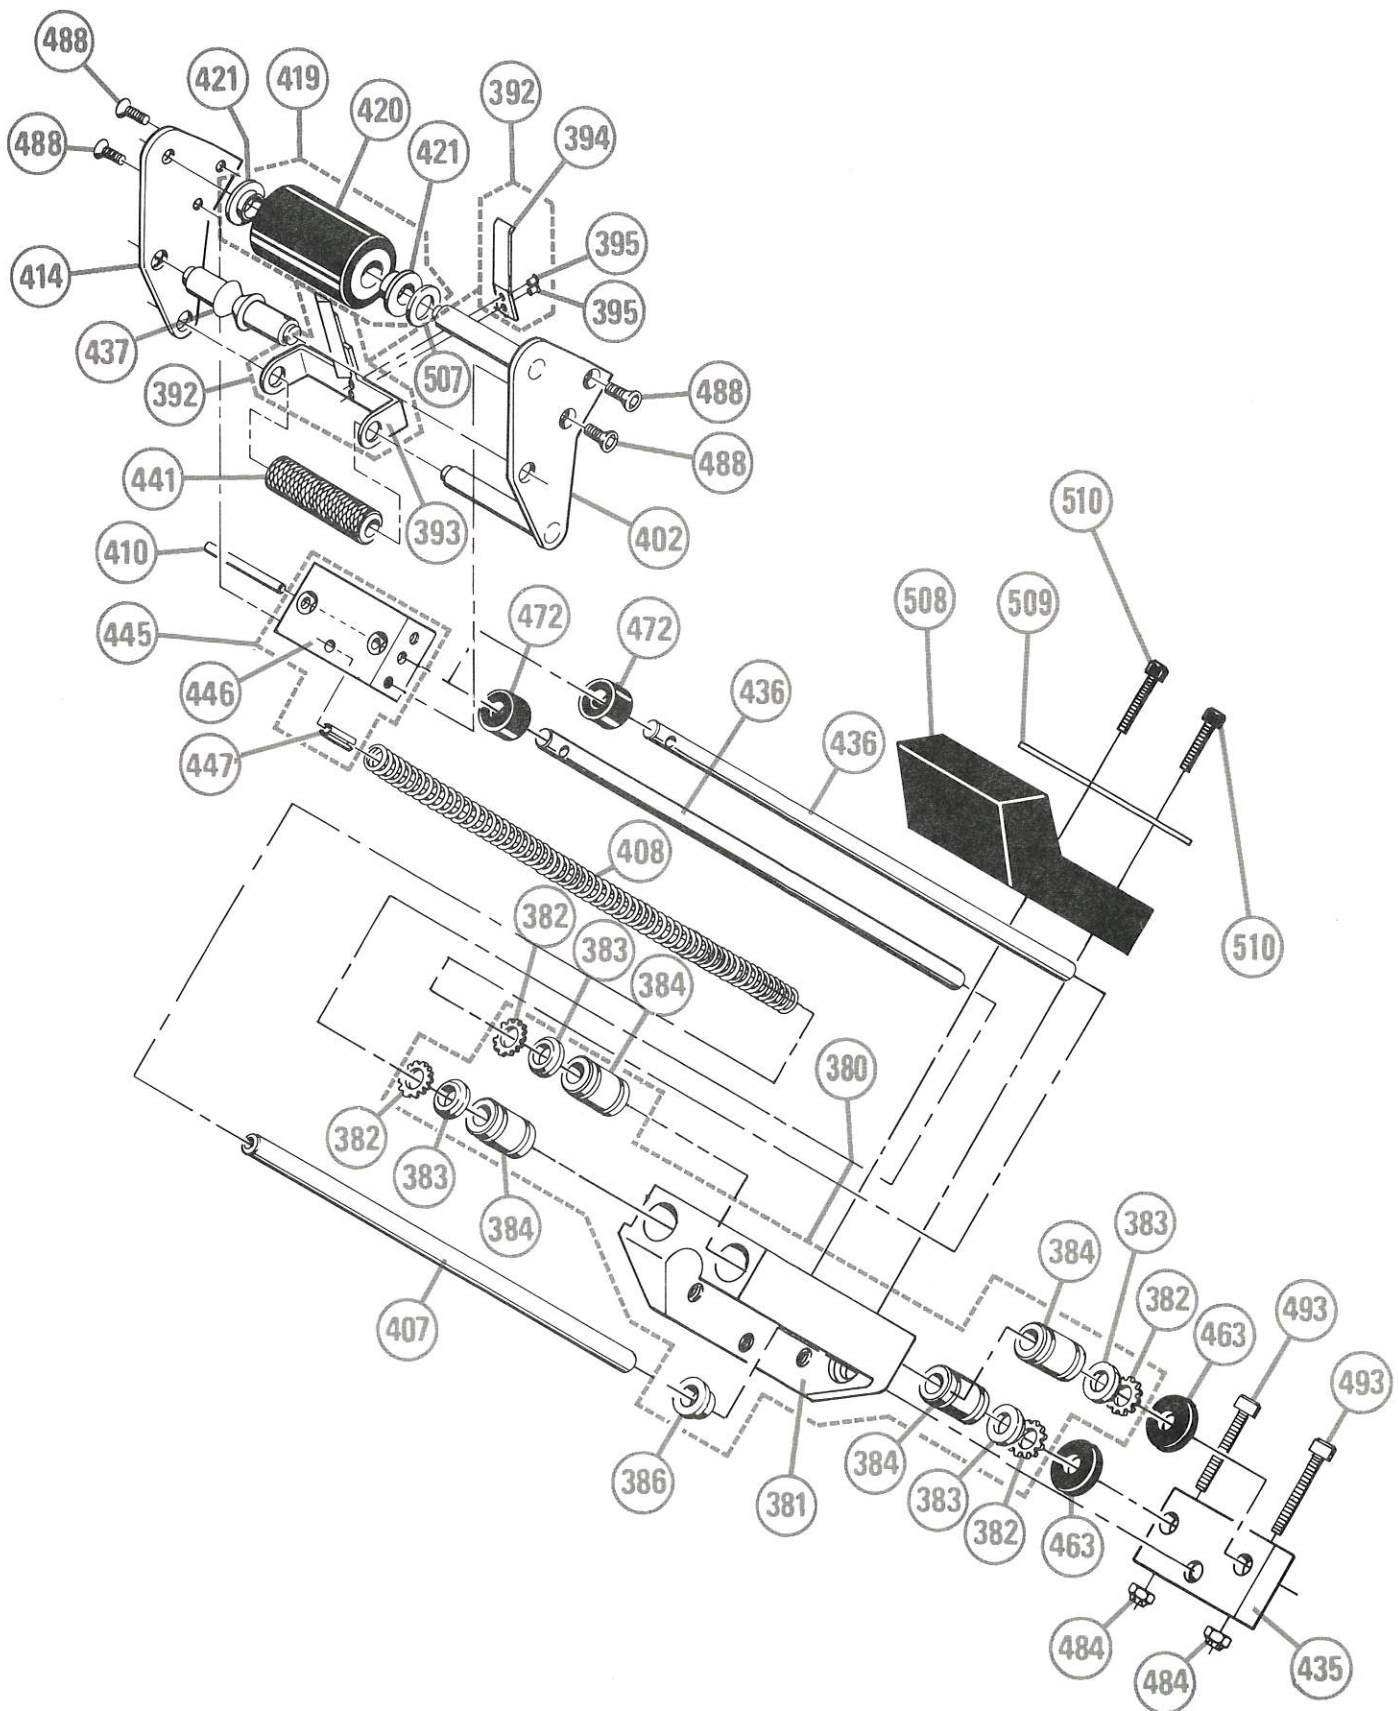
APPLYING ARM ASSEMBLY - LOWER HEAD
